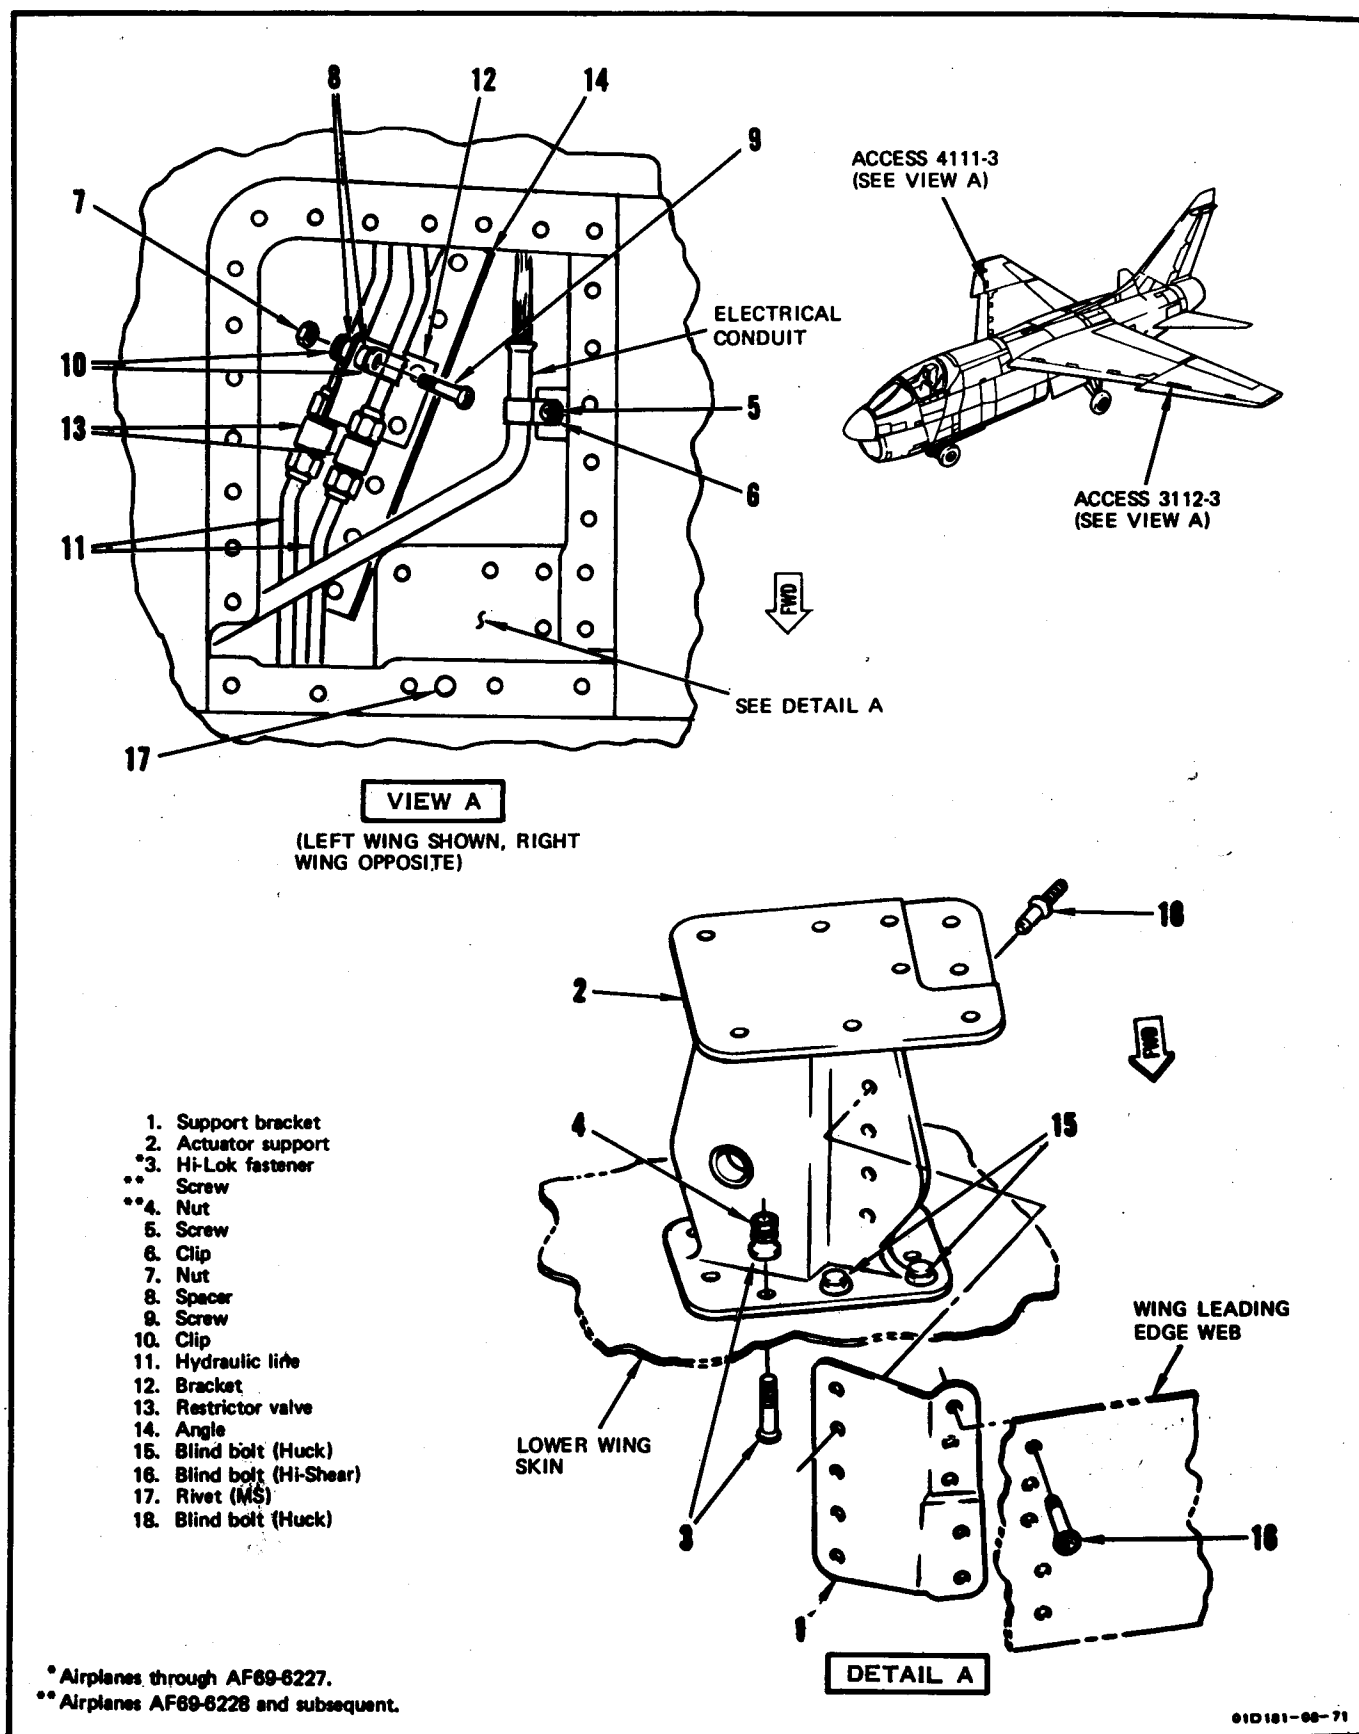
Wingfold Actuator Support Bracket Inspection, Removal, and Installation
